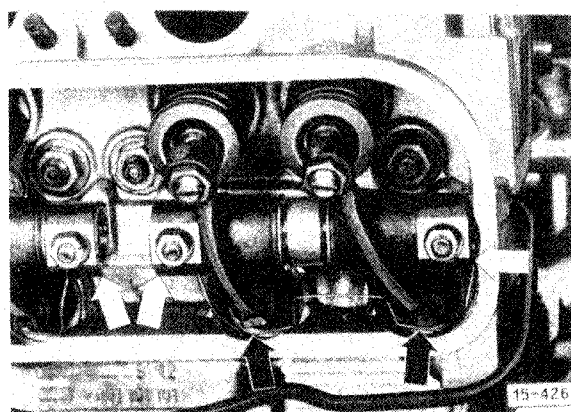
Retaining spring for pushrod tube, installed position (arrows)
